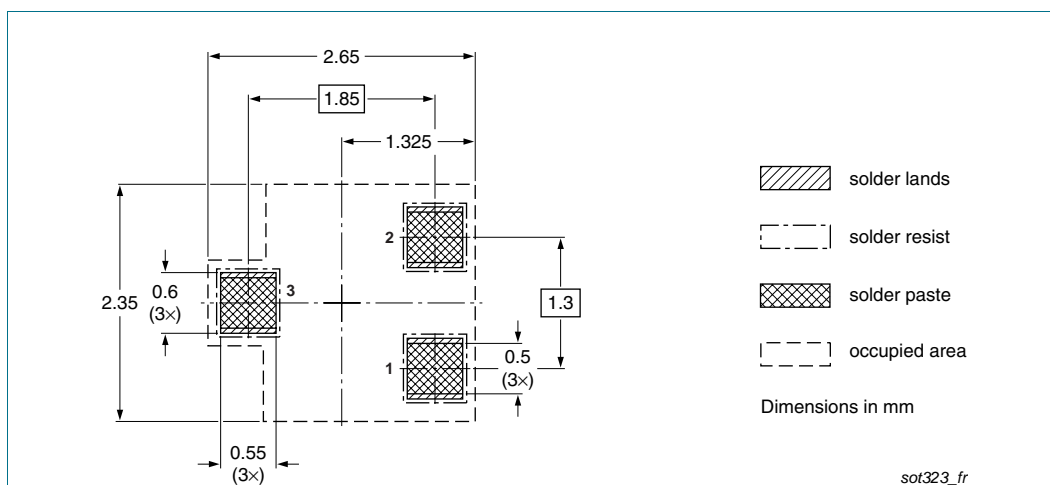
Reflow soldering footprint BAV99W (SOT323/SC-70)
